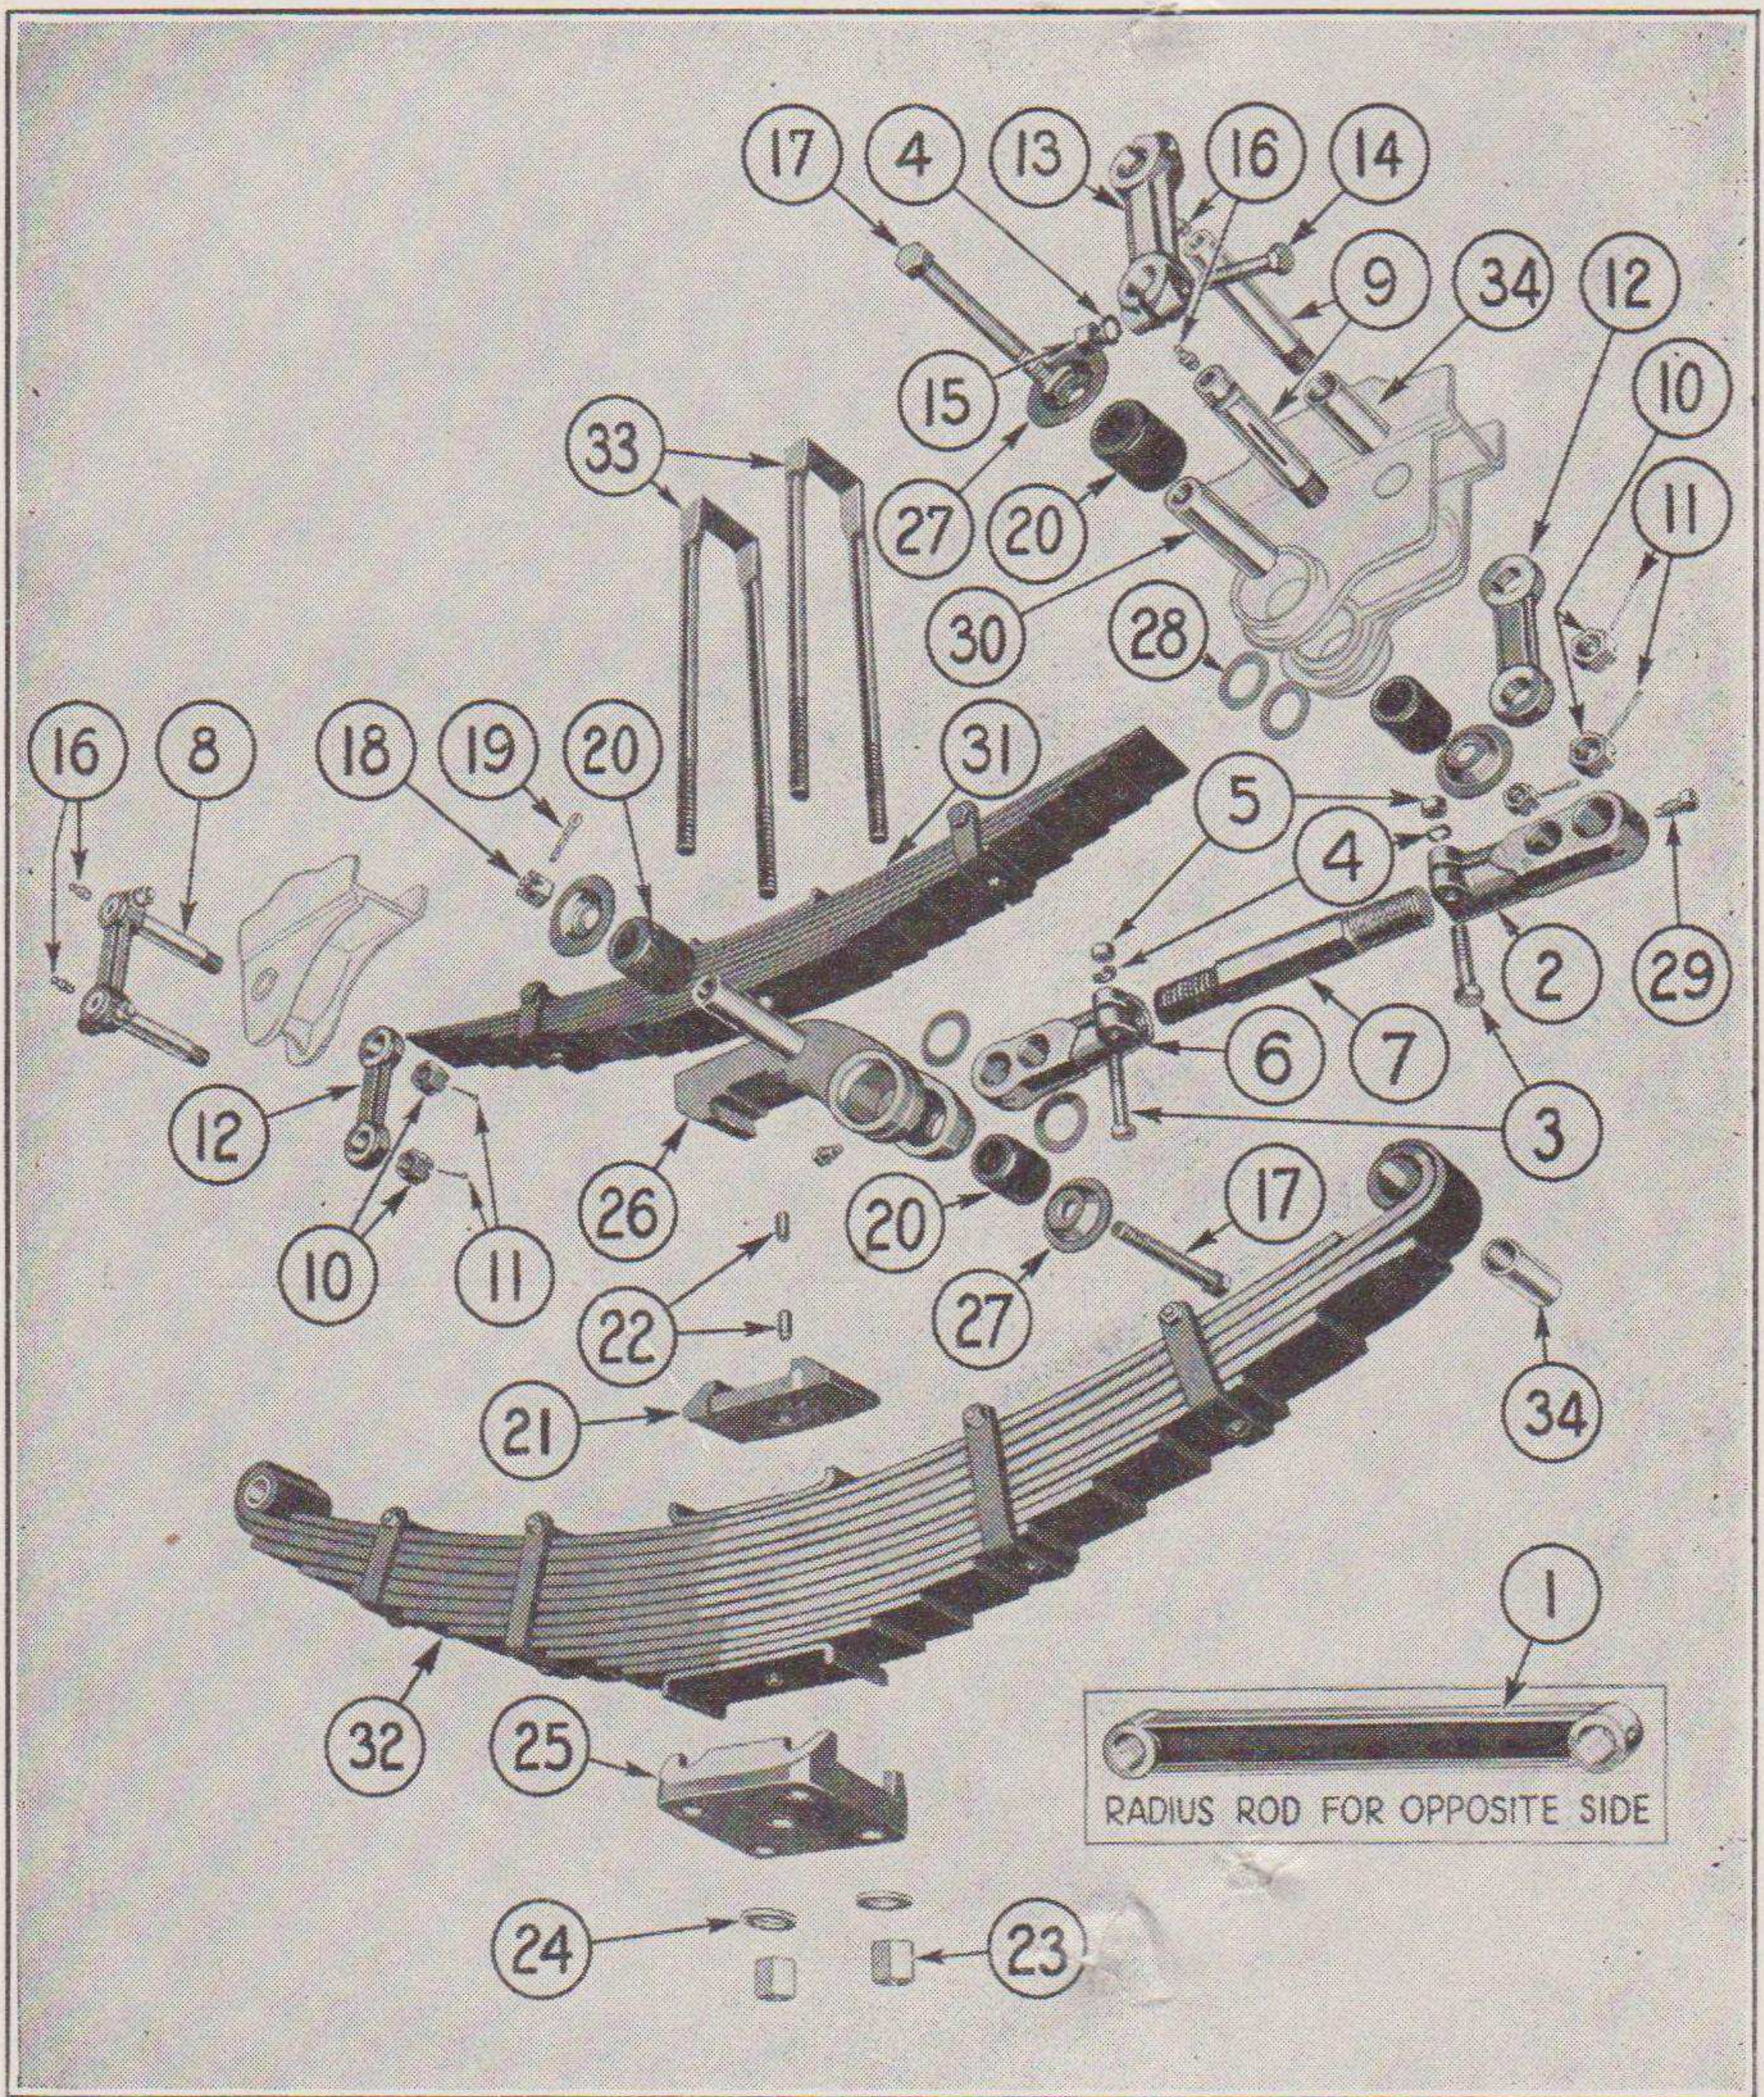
UNDERCONSTRUCTION ASSEMBLY
